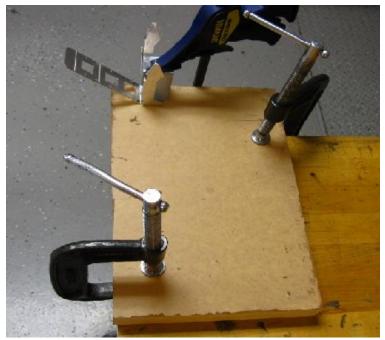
For parts with limited clamping area, a custom-made aluminum block may be needed to successfully clamp the part to something fixed (yellow solid plate).
